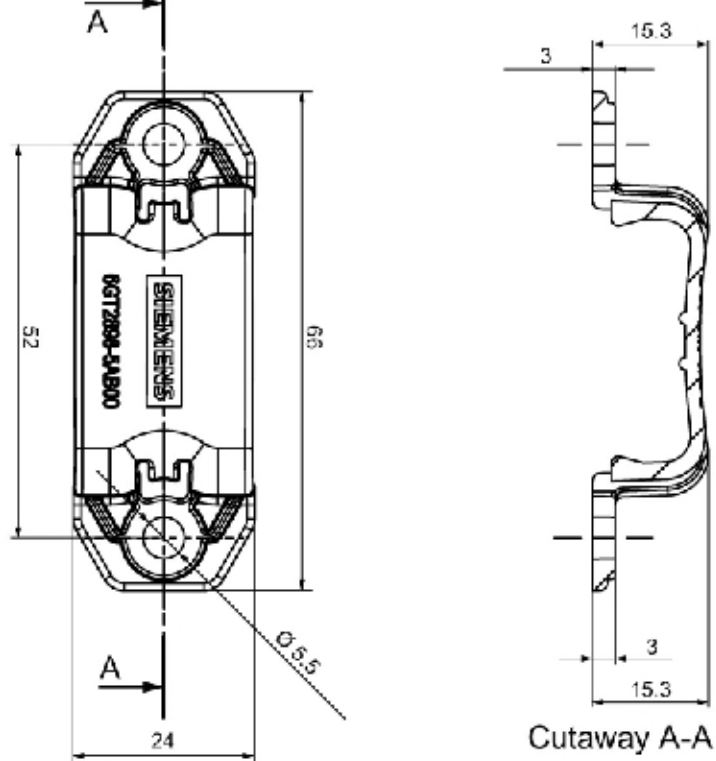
Dimension drawing mounting cover (6GT2898-5AA00) for SIMATIC RF645T
